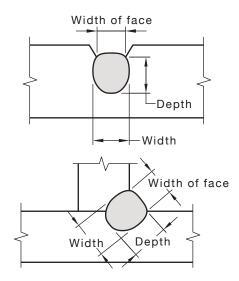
UNACCEPTABLE WELD RUN IN WHICH DEPTH AND WIDTH EXCEED THE WIDTH OF THE WELD FACE
